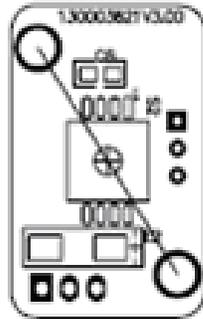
Drive Gas Pressure Sensor Board, Bottom View
